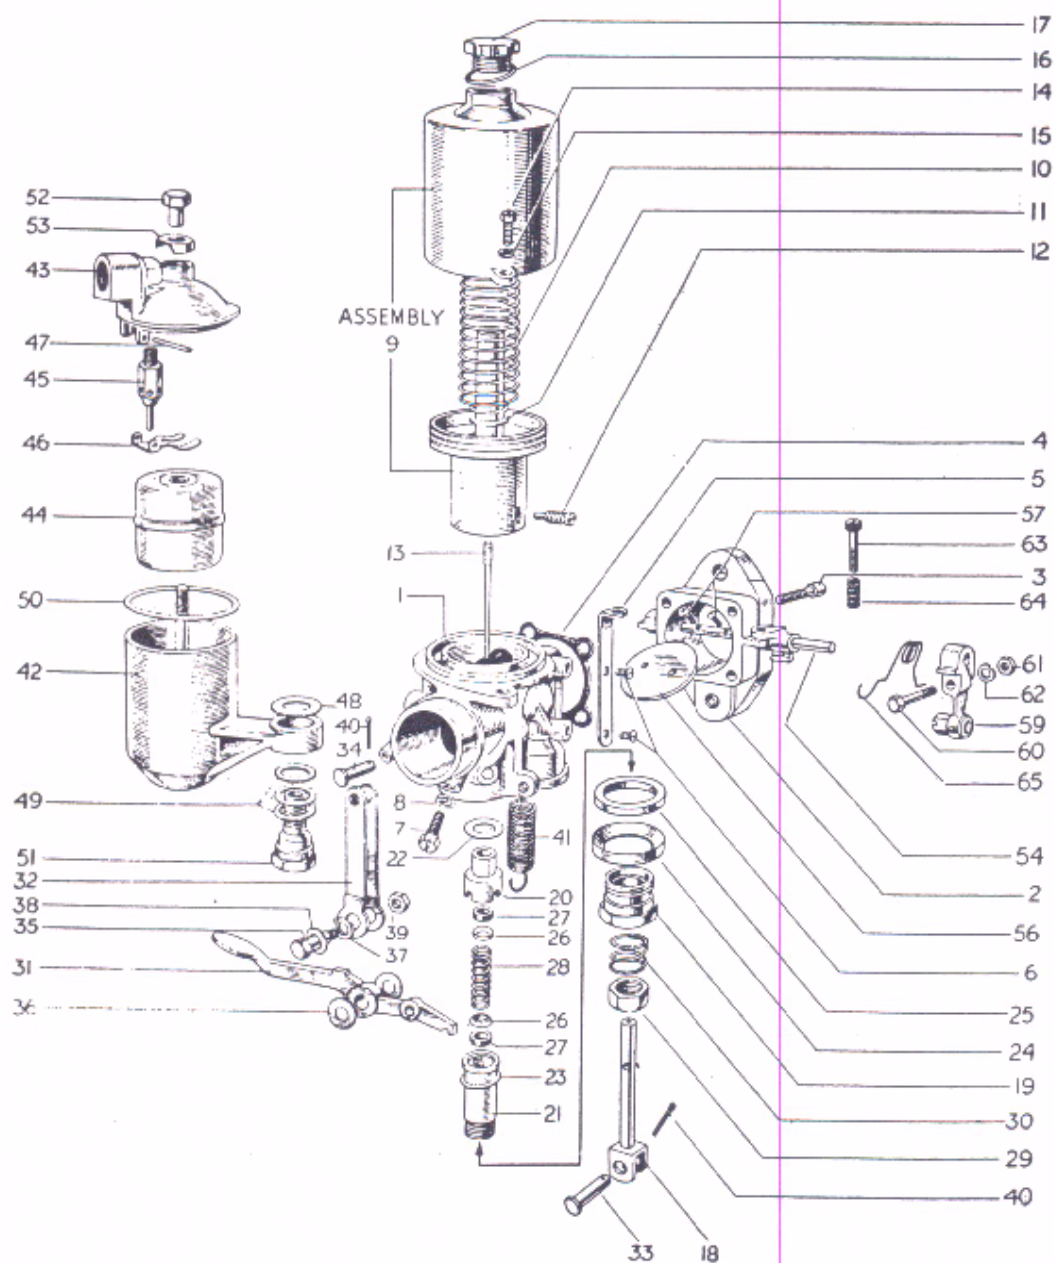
S.U. CARBURETTER (COMPONENT PARTS).
